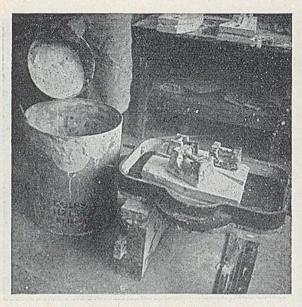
First Half-mould assembled on a Machined Plate ready for Pouring. If possible it is better to mix the whole amount of Plaster in one Container.
